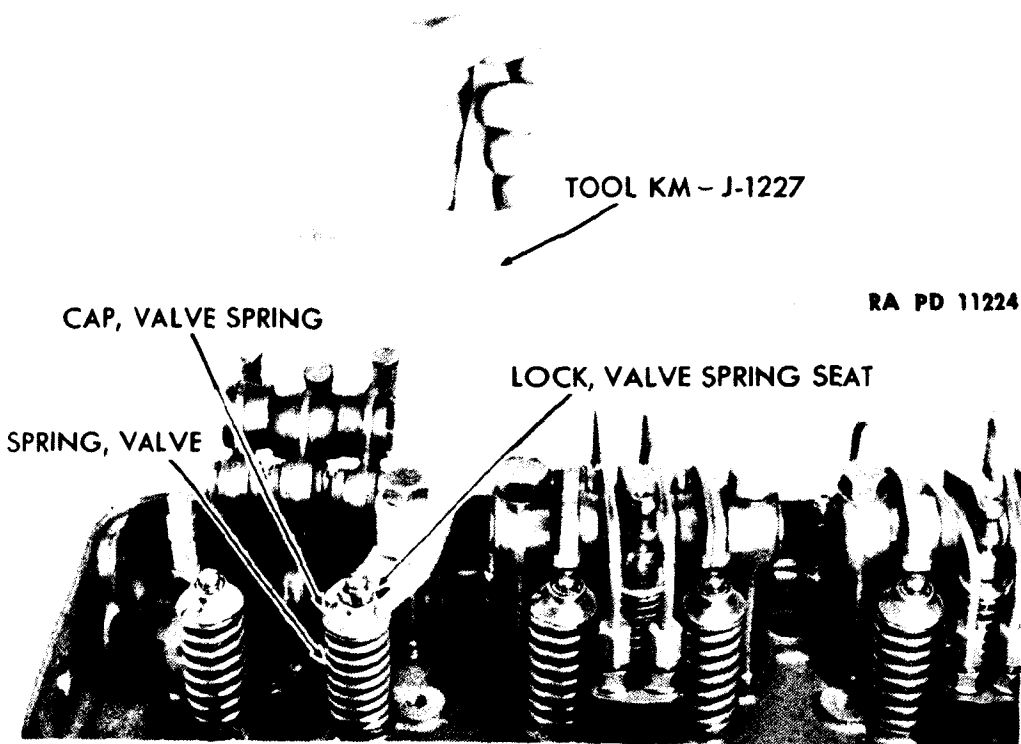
Compressing Valve Spring to Release Valve Spring Seat Lock
